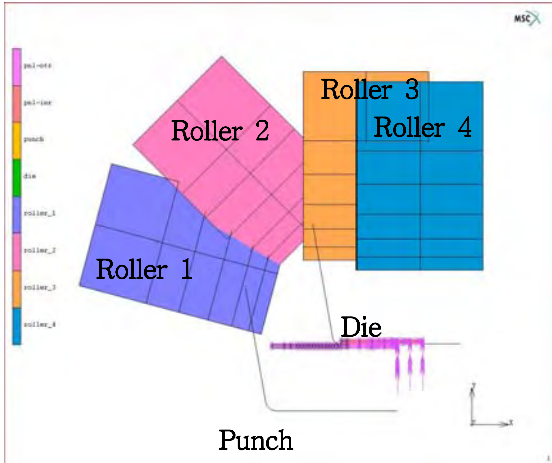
Punch and die set for flanging and rollers for the curl hemming
